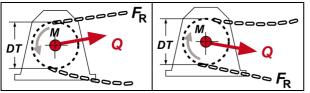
Overhung load on the output shaft of a geared motor resulting from a chain drive
